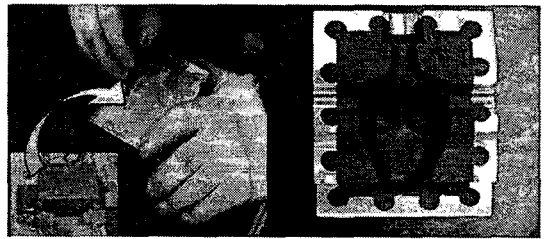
(b) Manufacturing process of horn base, (removing of upper-side part after the filling of polyurethane, finished ultrasonic welding base)
